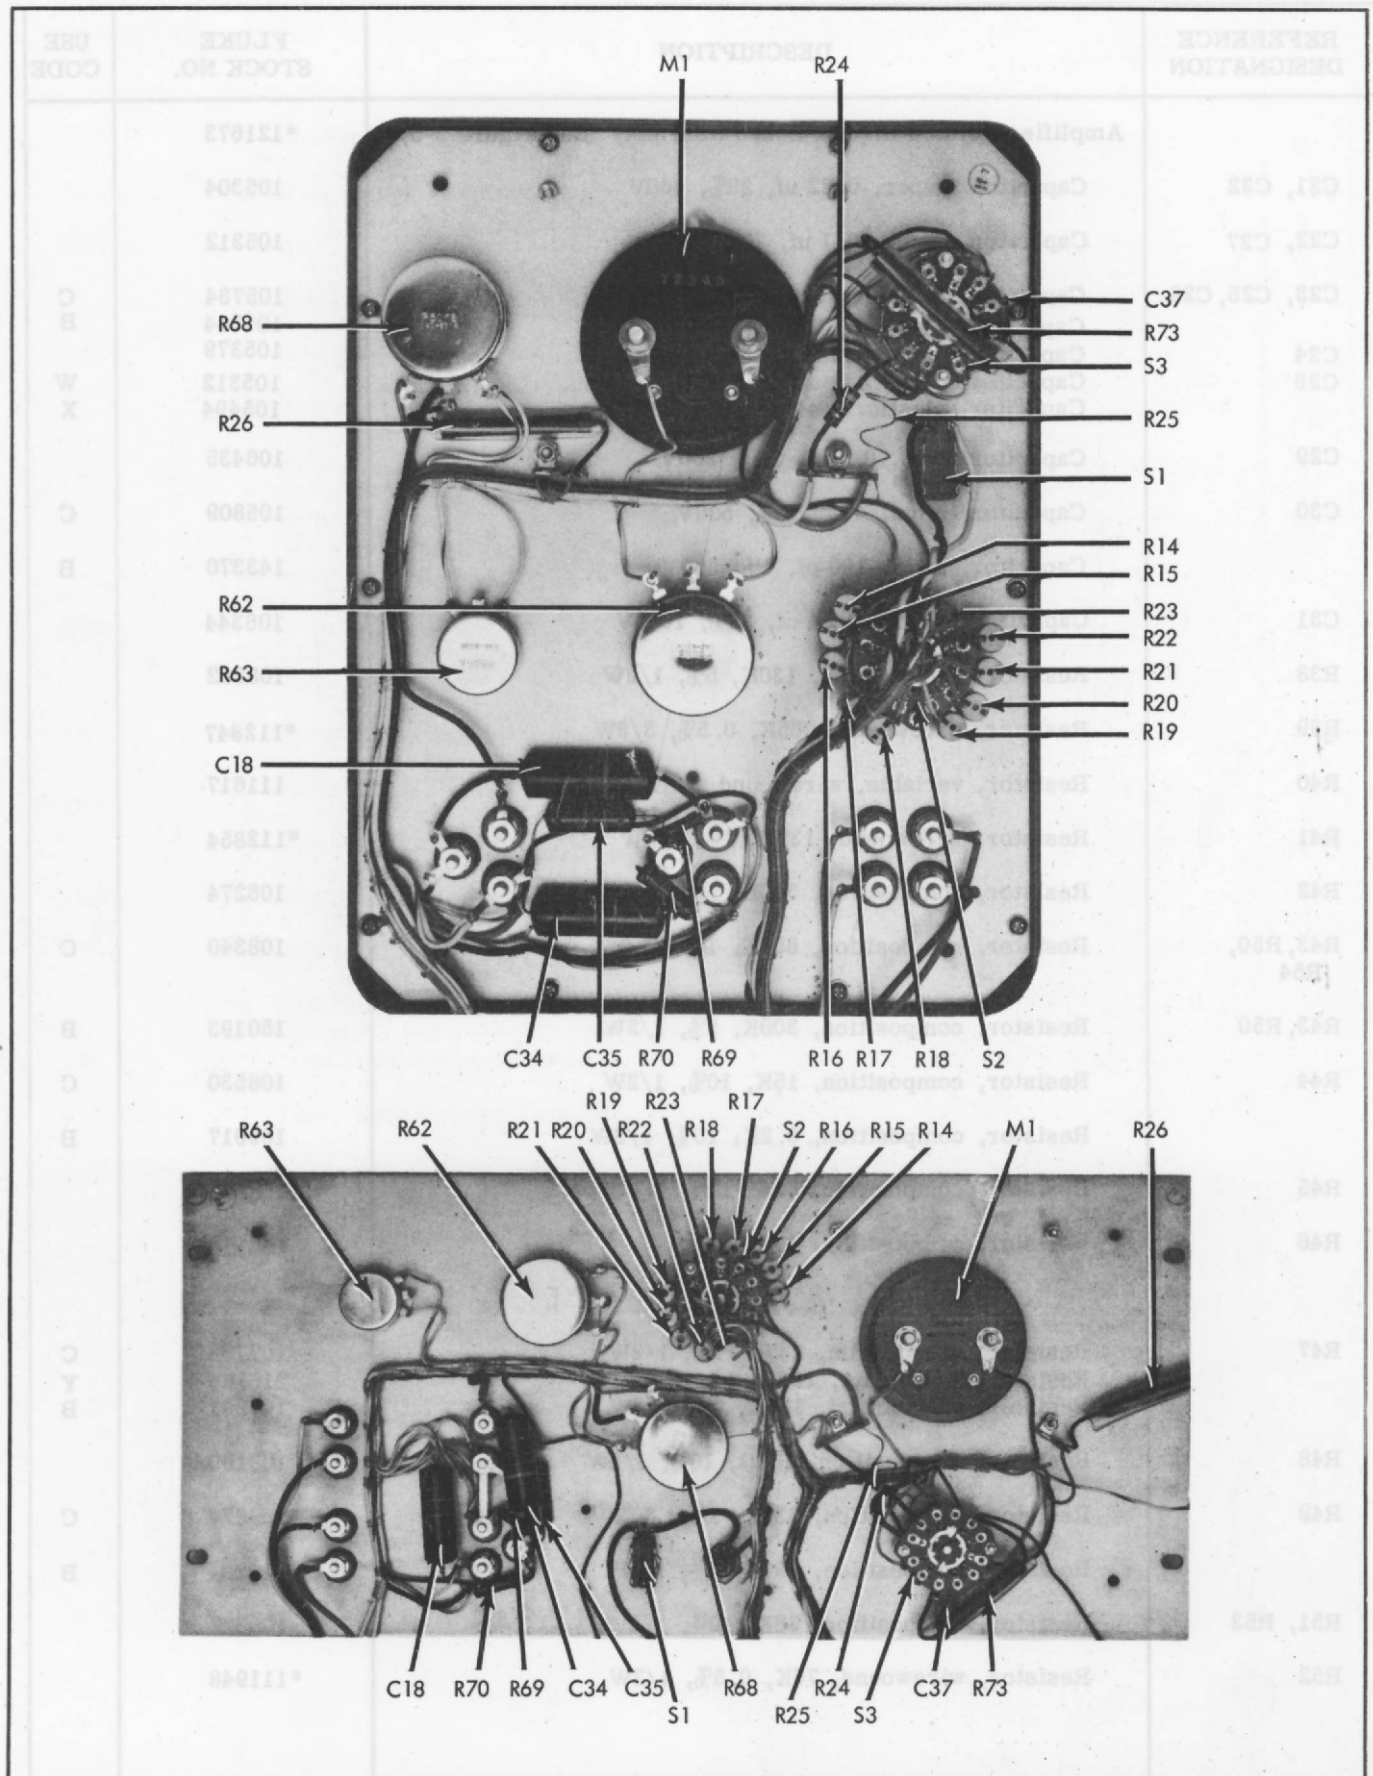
FRONT PANEL ASSEMBLY (sheet 2 of 2)
